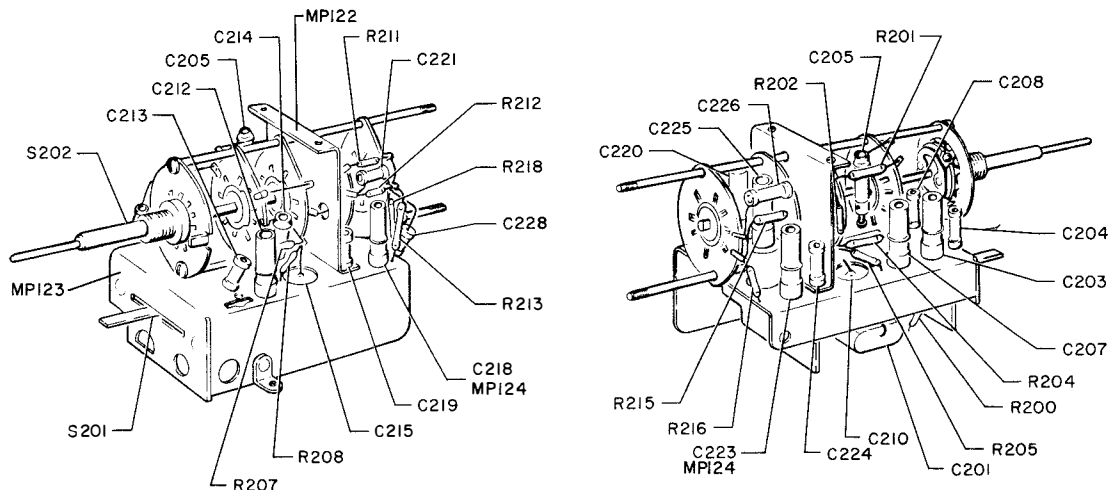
Channel B Attenuator Assembly A2A2, Location of Parts
